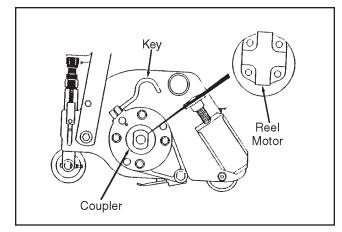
I-1. LF-3800 Reel Motor Removal and Installation
